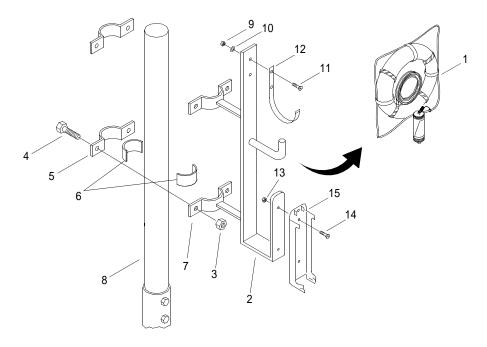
Life Ring Buoy and Hanger Bracket Assembly
